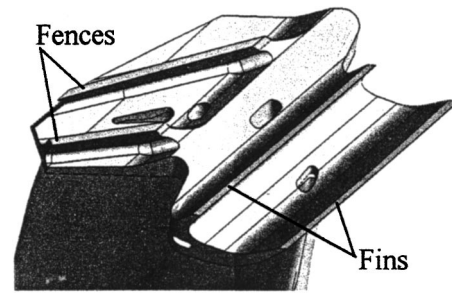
Perspective view of a typical shroud top geometry for a Rolls-Royce civil HP turbine rotor
